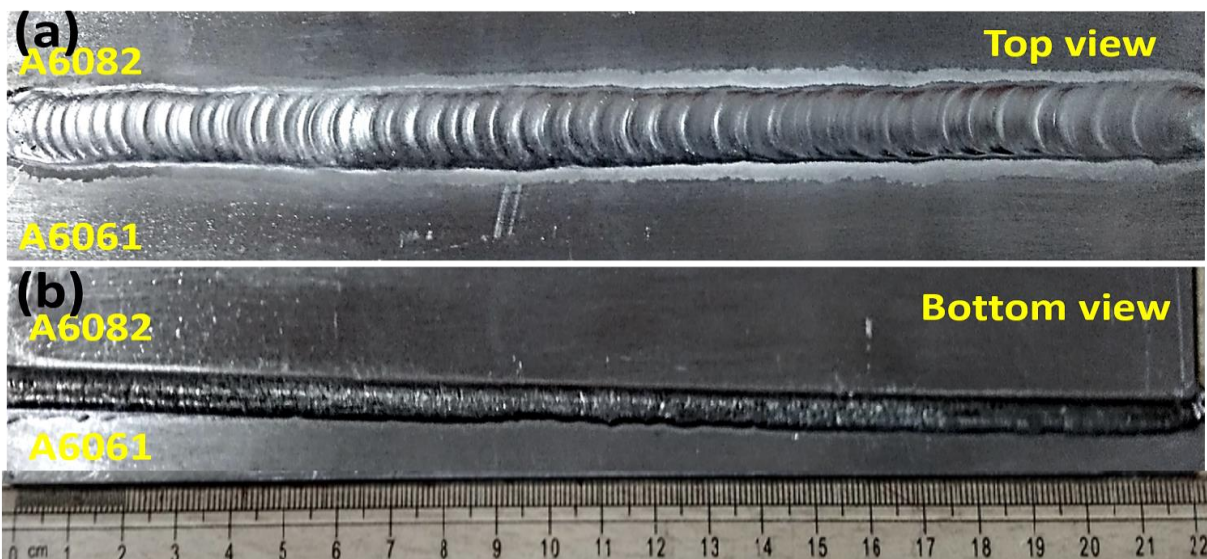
Surface appearance of the TIG welded A6061 and A6082 joint using ER5356 (a)
